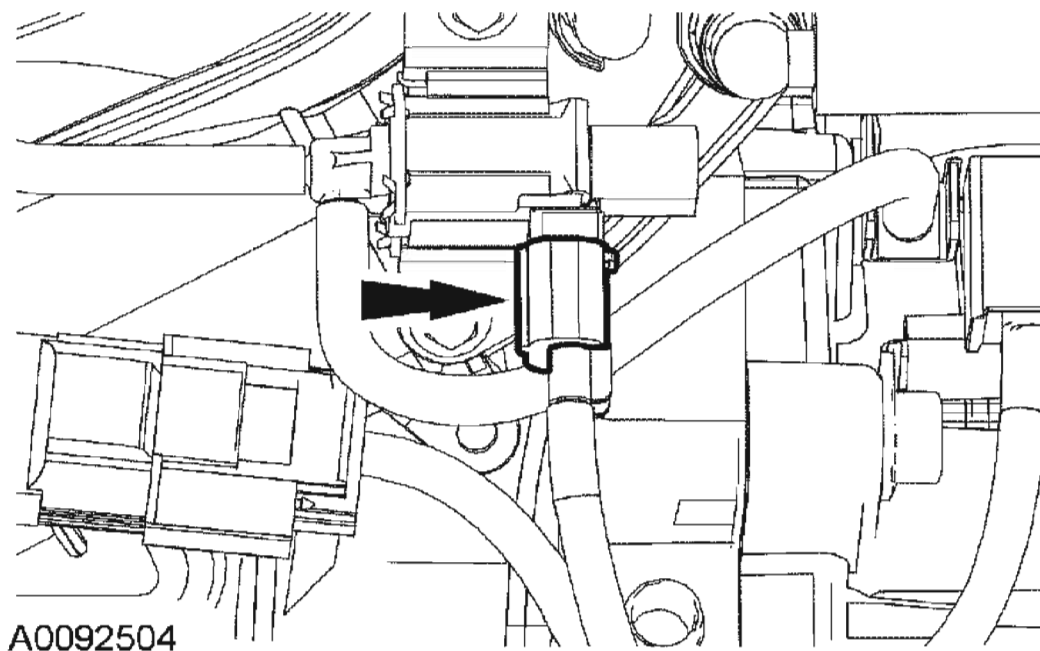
Disconnecting Swirl Control Valve Electrical Connector
